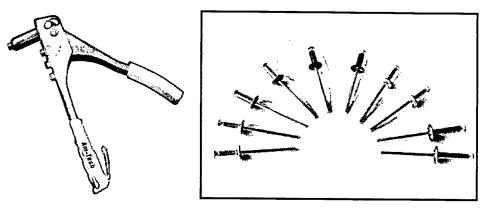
Rivet Gun and Blind Rivet (POP Rivet)
